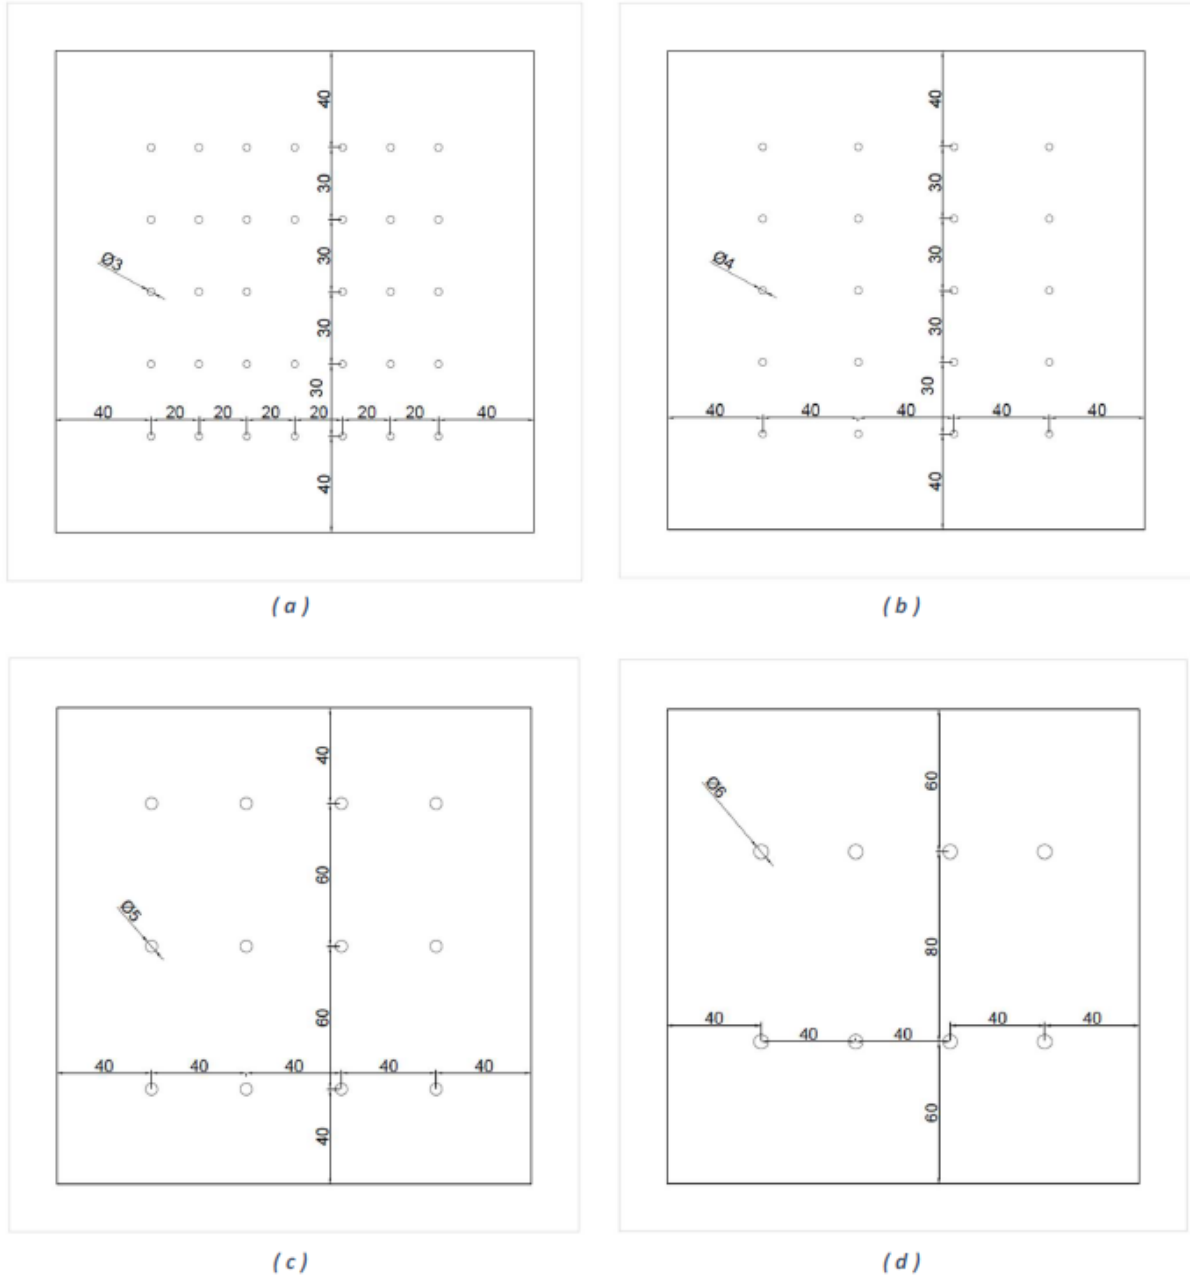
Tray dimensions – (a) 3mm hole diameter. (b) 4mm hole diameter. (c) 5mm hole diameter. (d) 6mm hole diameter.
